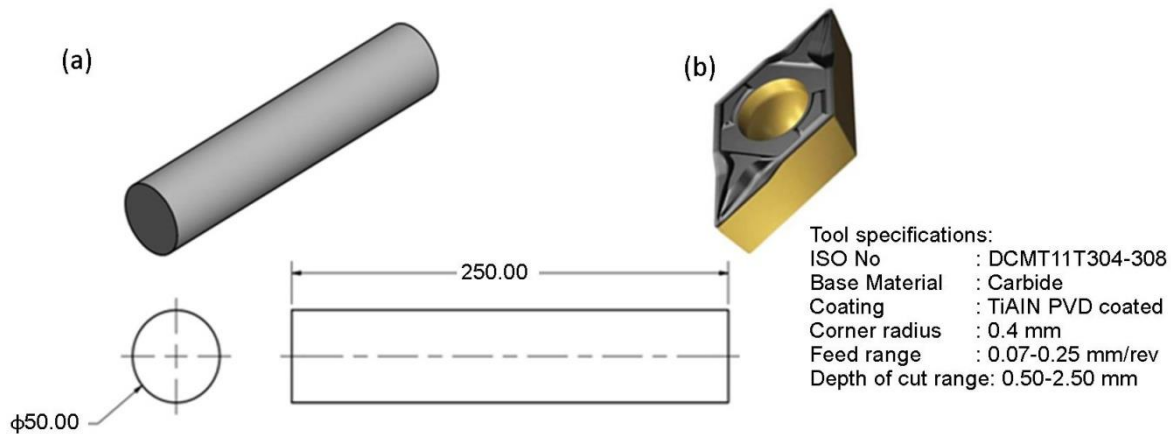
(a) AISI 4340 steel rod (b) TiAlN coated carbide insert tool
